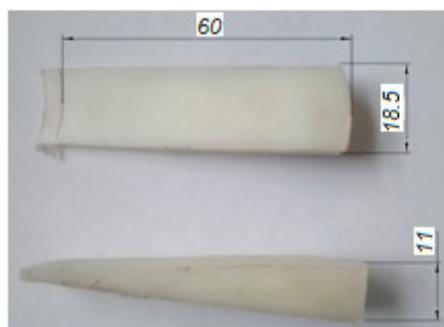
Geometry of the inserts with appropriate dimensions labeled.
